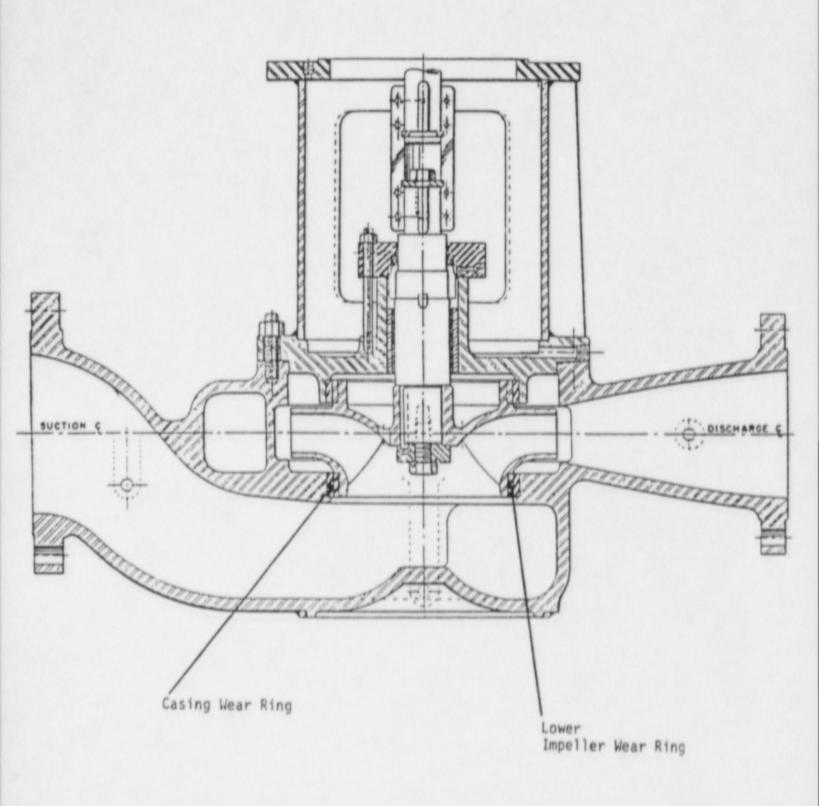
Typical CVIC RHR Pump Sectional Assembly
